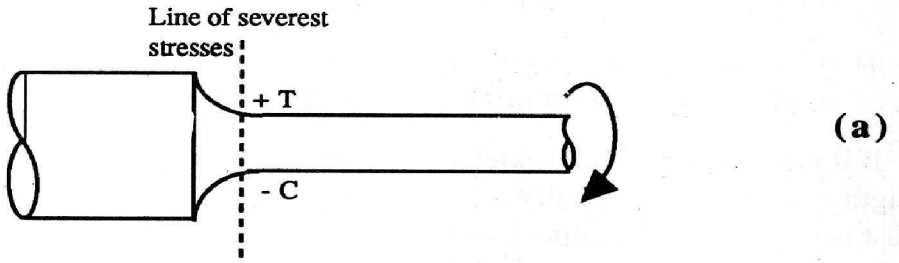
Weakest link failure in a shaft rotating under bend load
